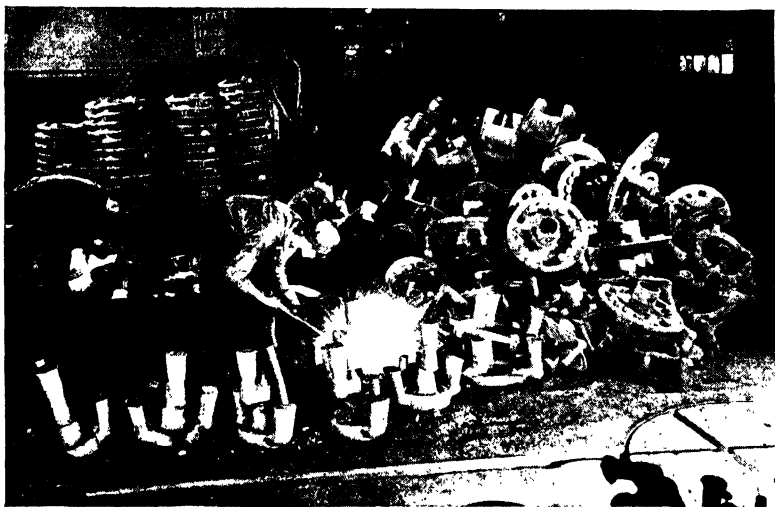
Removing gates and risers from small steel castings by flame cutting.
